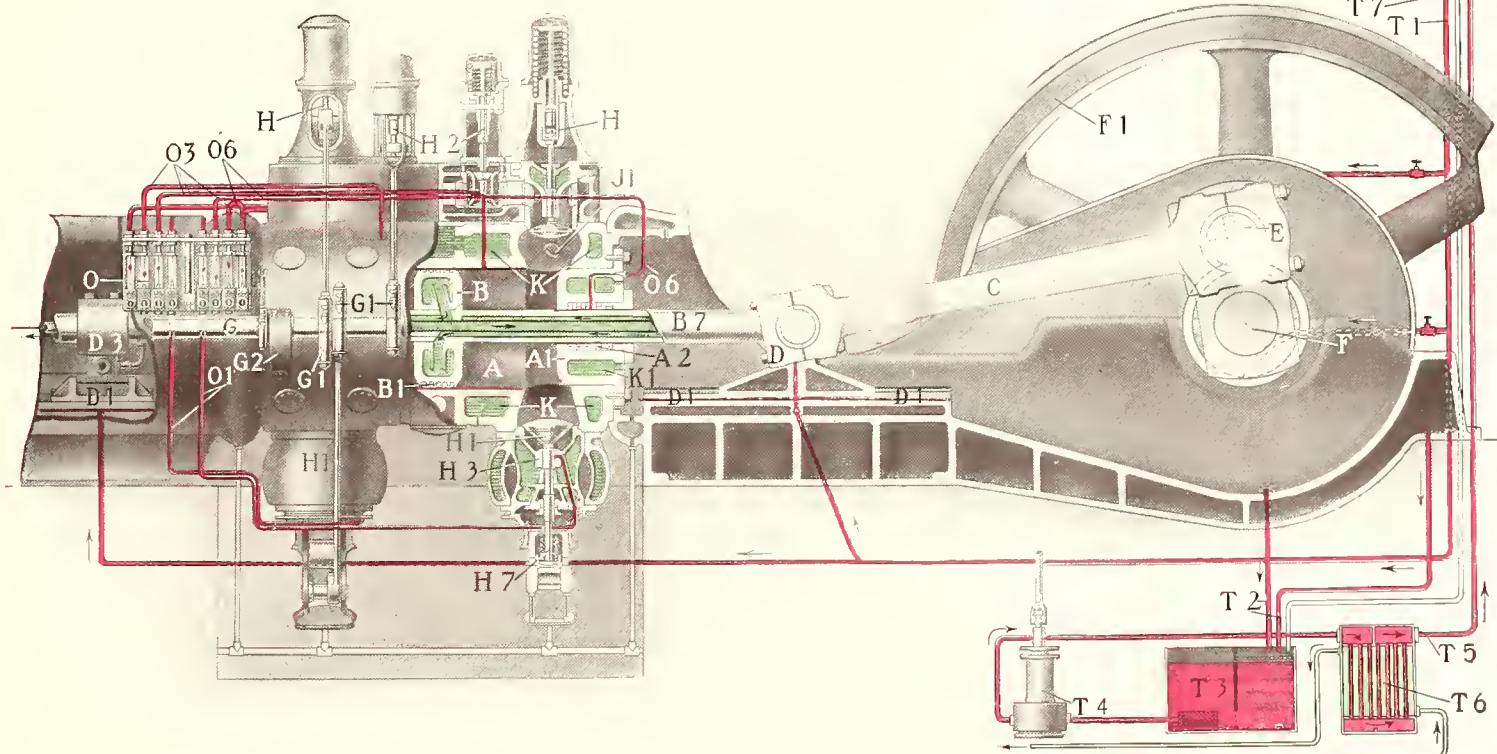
Sectional View of One Cylinder of a Tandem, Four-stroke Cycle, Double Acting Gas Engine
